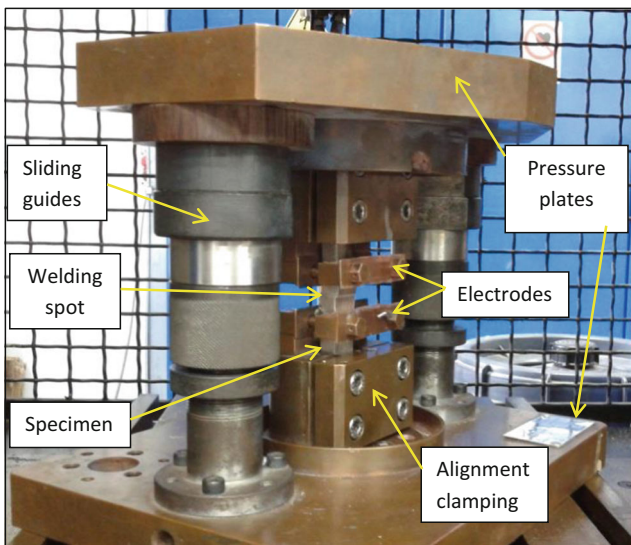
Welding equipment with welded specimens gripped in the centre
